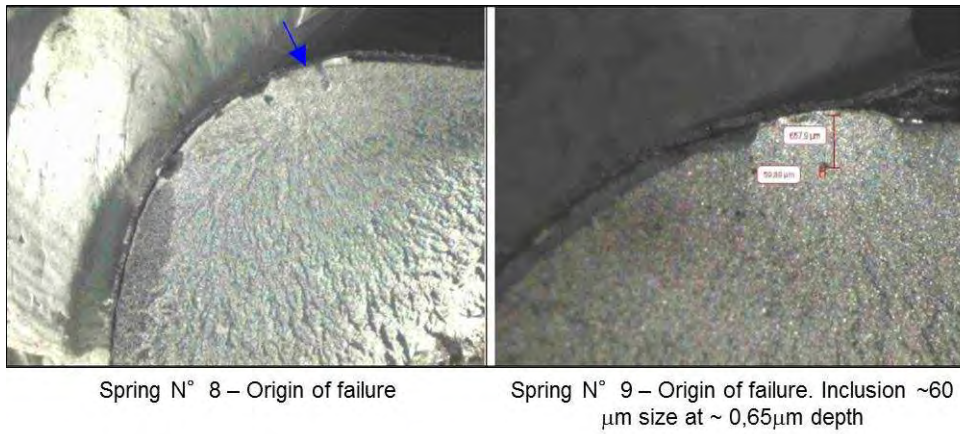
53SiVMo8Nb STDG spring – Surface fracture analysis.
